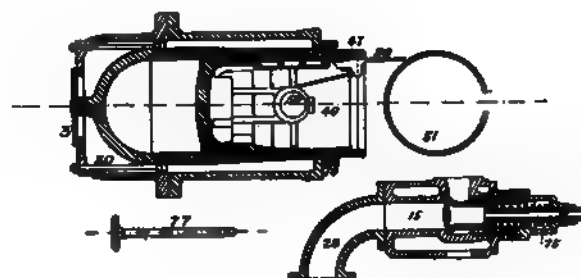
Section through Cylinder and Exhaust of Gas Engine.
